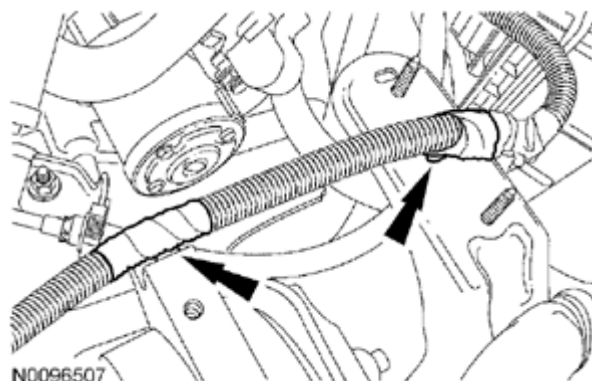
Locating Wiring Harness Retainers Of Battery Tray Bracket And Transaxle Mount
